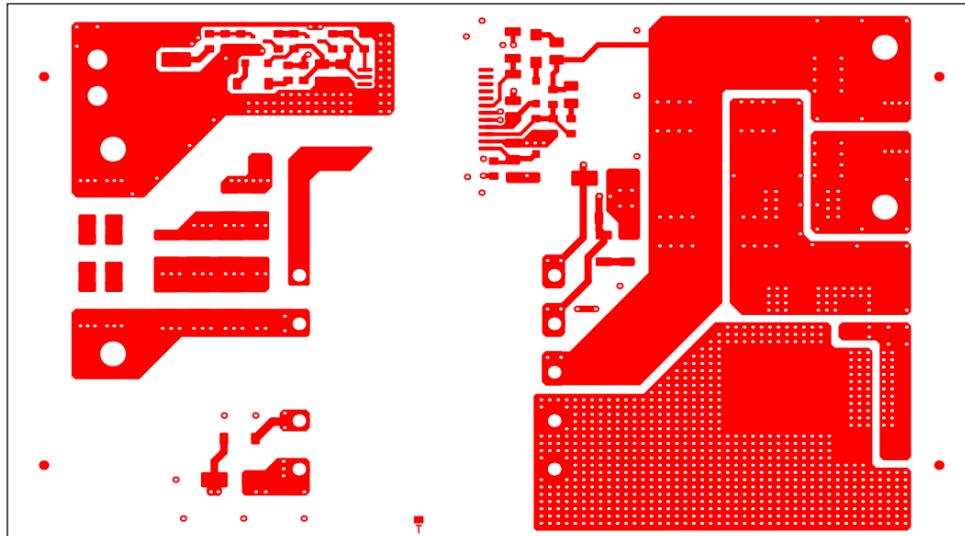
RDR-1074Q Top Layer PCB Layout.
